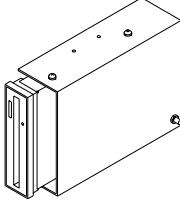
Disk Drive Module (DDEA), Parts Common to All
